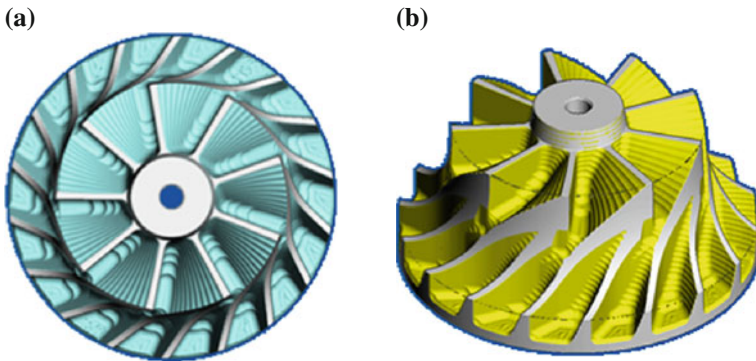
3-axis rough machining (*first stage*). a Top view. b Isometric view
